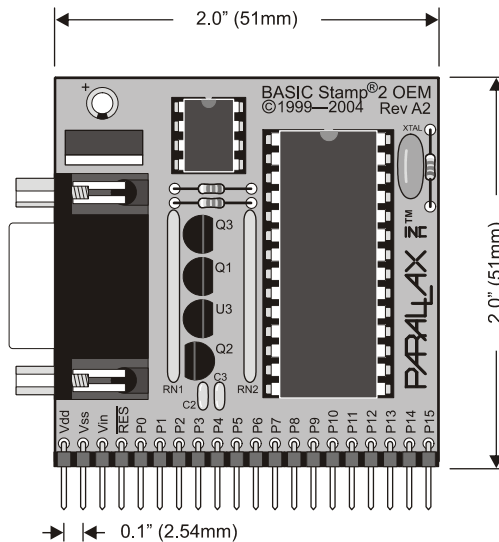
BASIC Stamp 2 OEM (Rev. A2) (Stock# 27290 assembled, or #27291 in kit form).
